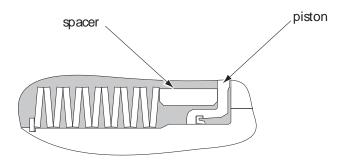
Install piston return springs. First spring with larger diameter of bevel towards wear sleeve. See Figure 65. Alternate thirteen (13) springs. See note Figure 56.
